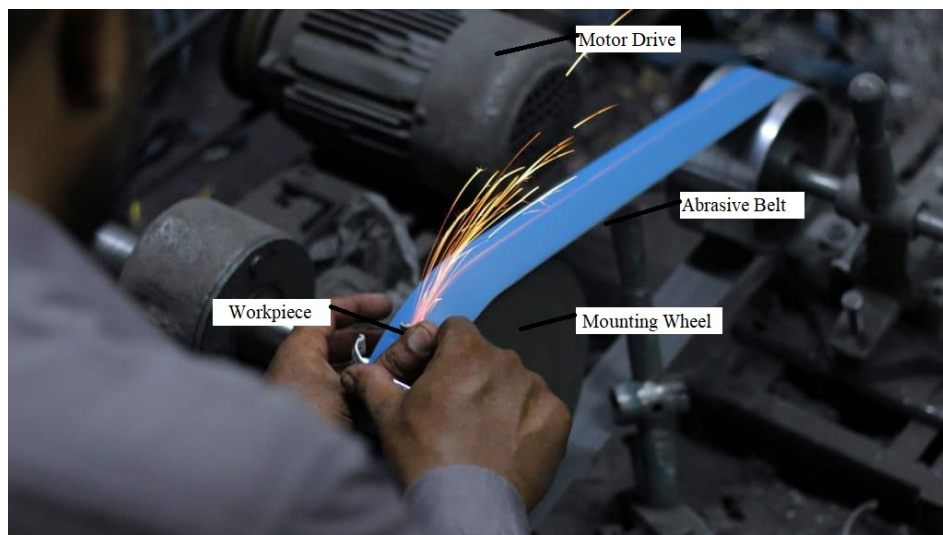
A worker polishing a workpiece on an abrasive belt polishing machine.
